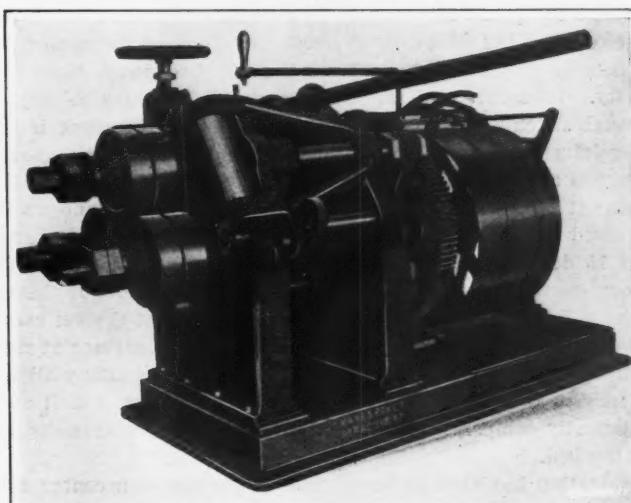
Kane & Roach Angle Bending Machine equipped with Reversing Pulleys for Belt Drive
